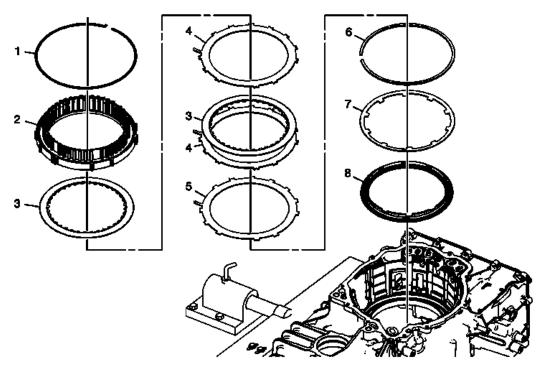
Identifying Low & Reverse Clutch Plate Courtesy of GENERAL MOTORS COMPANY
